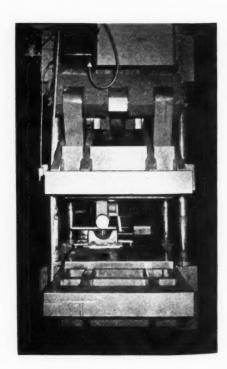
(Left) 700-ton Metal-forming Press Fabricated by Arc Welding in Thirty-five Working Days
